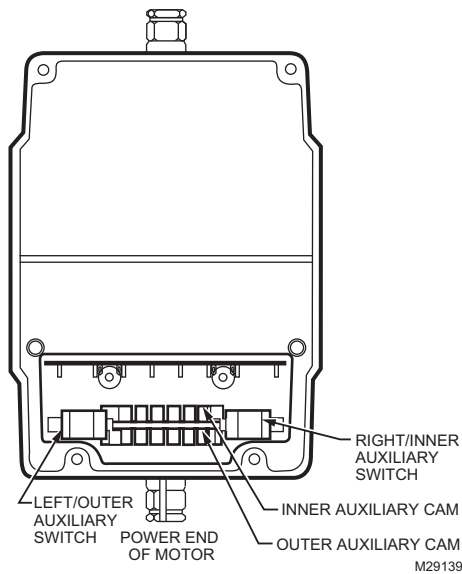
Auxiliary switch adjustment for M6285 motors.
